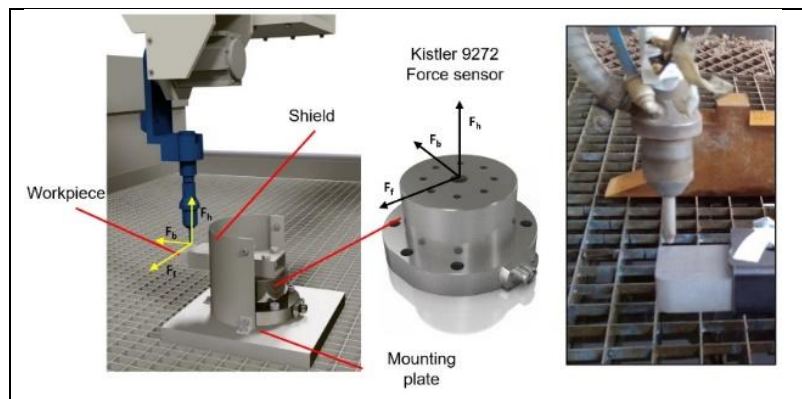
Experimental setup for force measurements during high-pressure abrasive waterjet cutting
